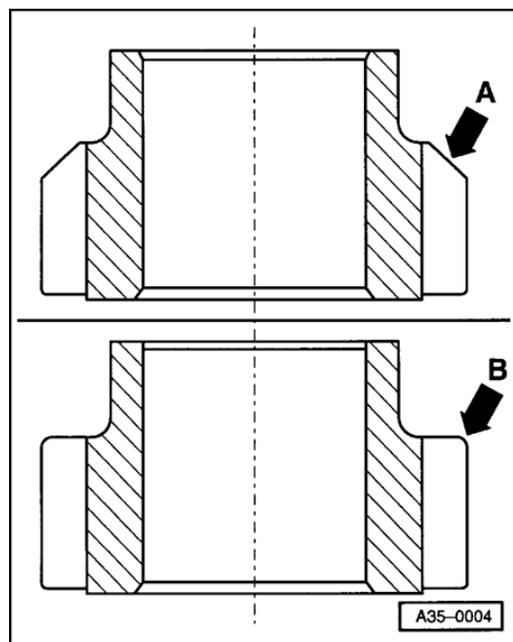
Allocation of operating sleeve for 5th and reverse gears
